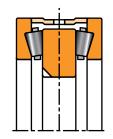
Typical TTDFLK assembly (with flat double inner raceways).
